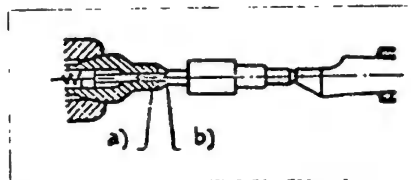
Schematic Drawing of Mounting by the Driving Center, Set in the End of the Pinion
